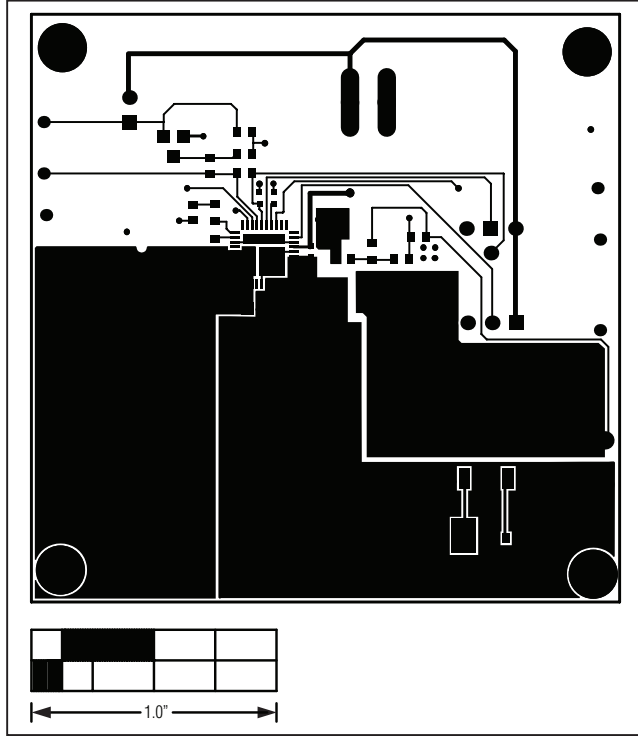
MAX15035 EV Kit PCB Layout—Solder Side
